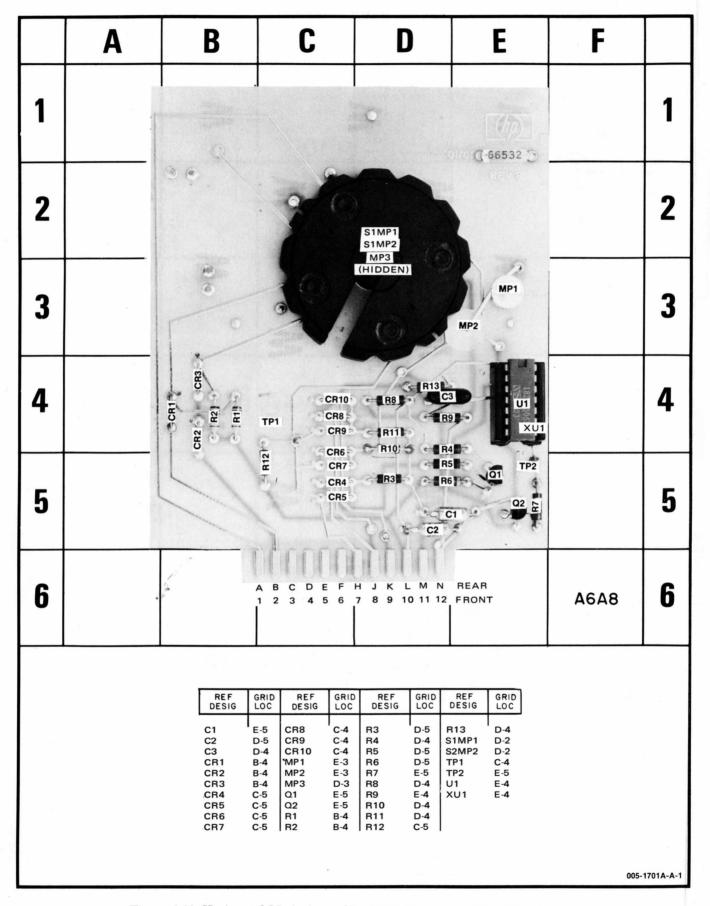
Horizontal Mode Assembly A6A8 Component Identification
